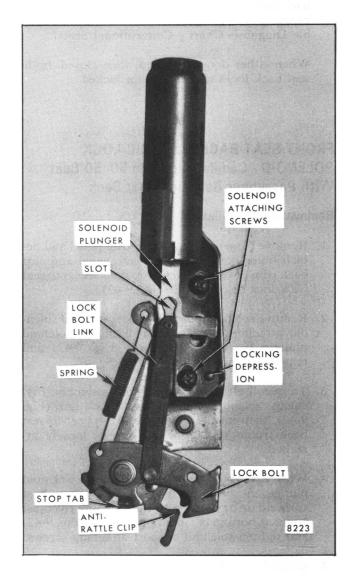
Front Seat Back Electric Lock Solenoid and Support Assembly - All Two-Door Styles with Standard Full Width, 60-40 or 40-40 Seats
